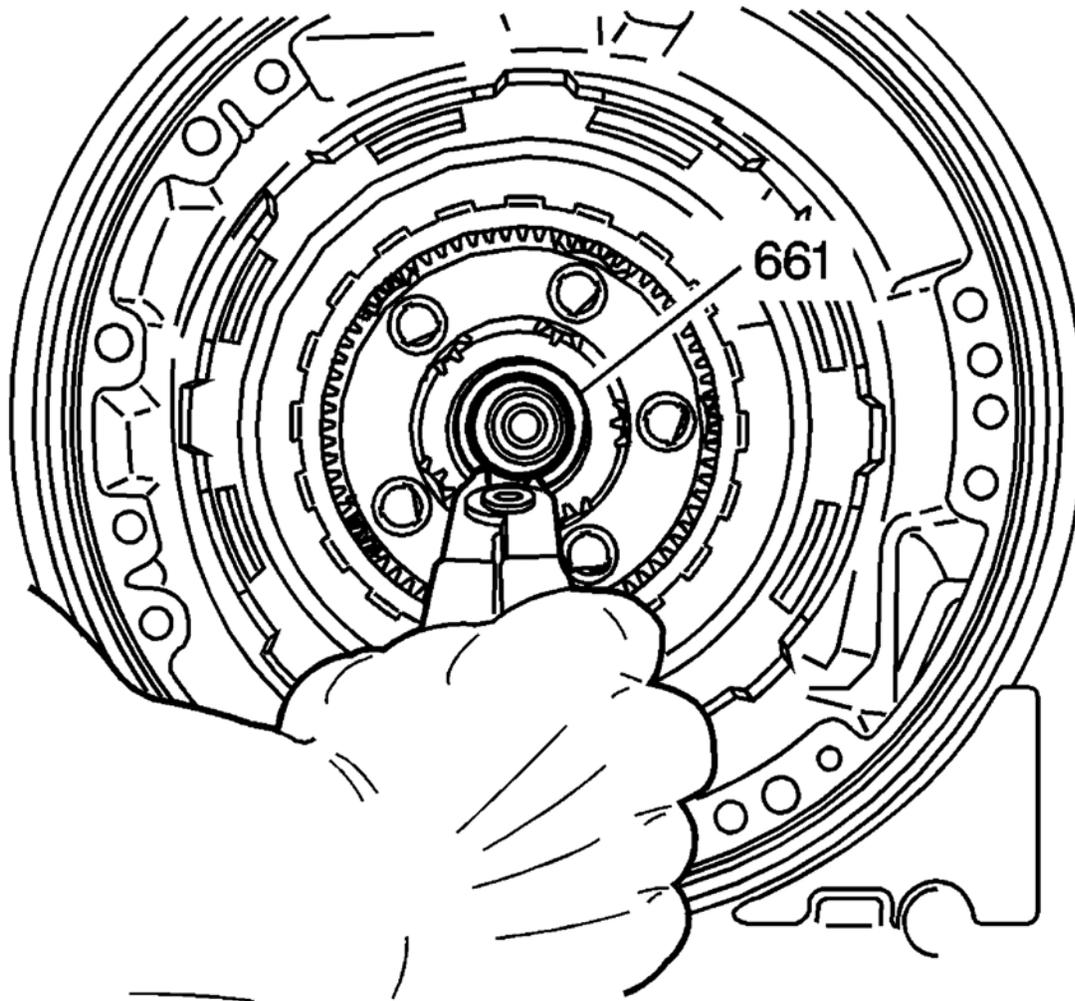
Removing Output Shaft To Input Carrier Retainer
